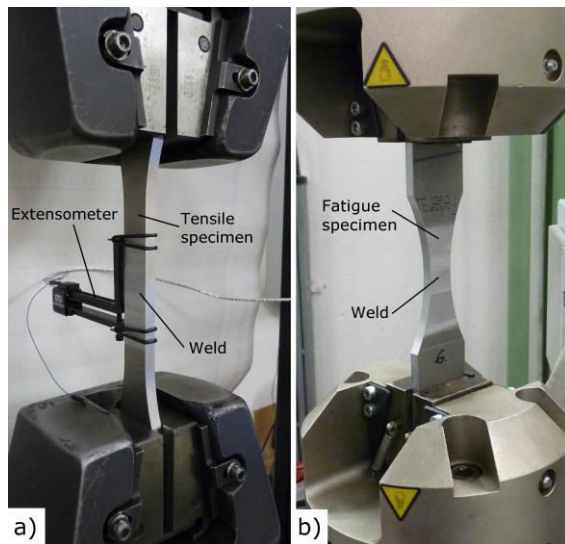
a) Tensile (AWS D17.3) and b) fatigue (EN 6072) test set-up.
